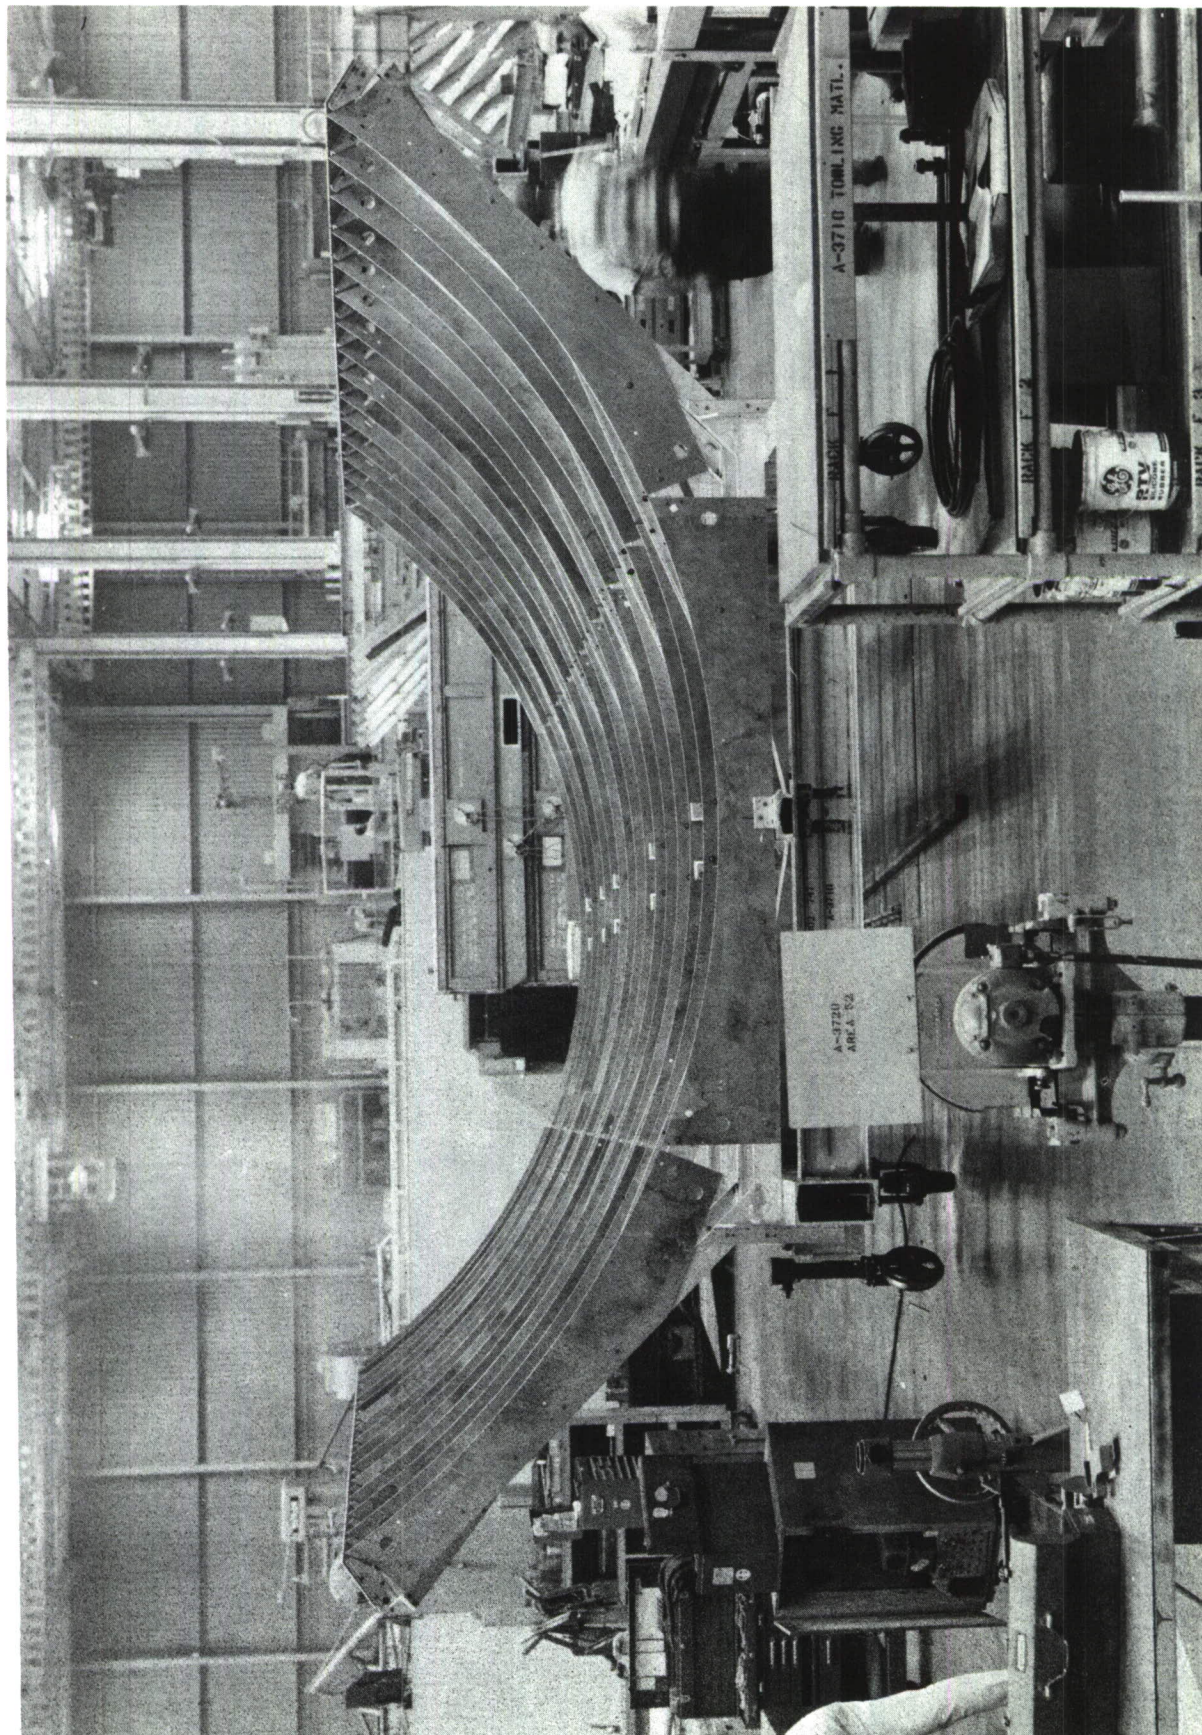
Header-and-Skin-Type Bonding Assembly Jig for Simple Contours (Headers Ready for Application of Jig Skins)
